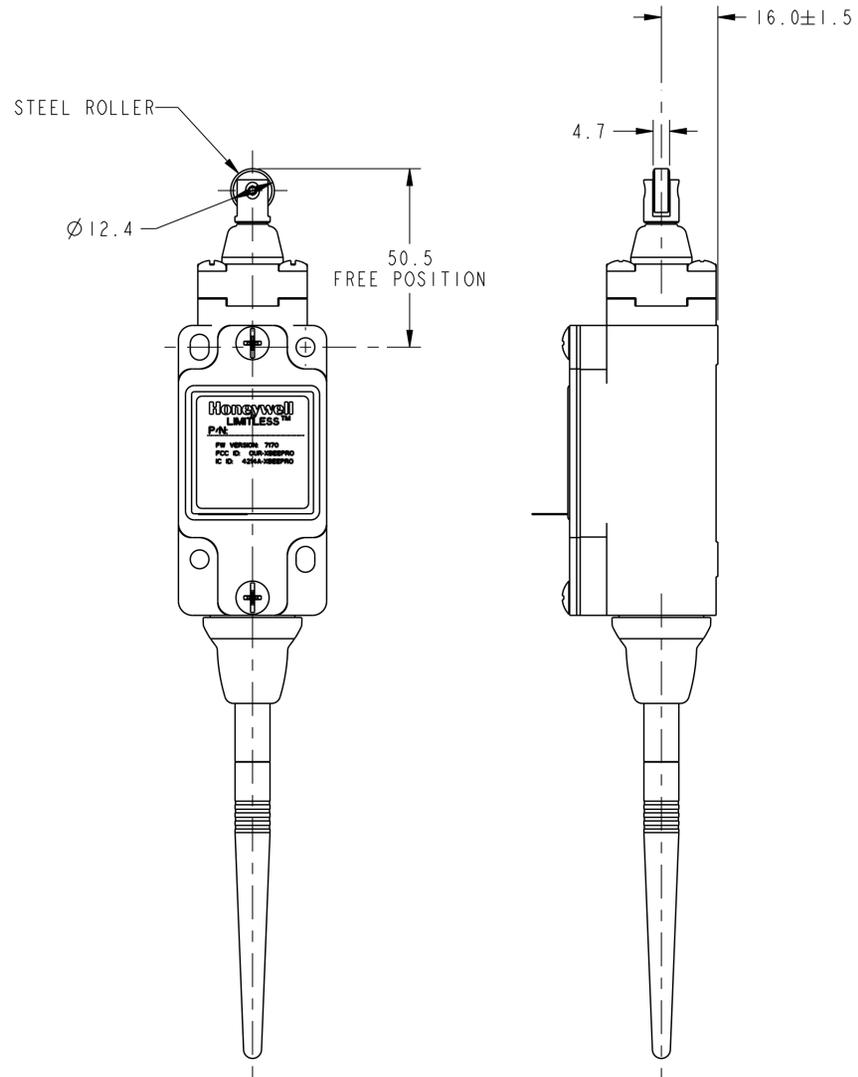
TOP ROLLER PLUNGER HEAD
